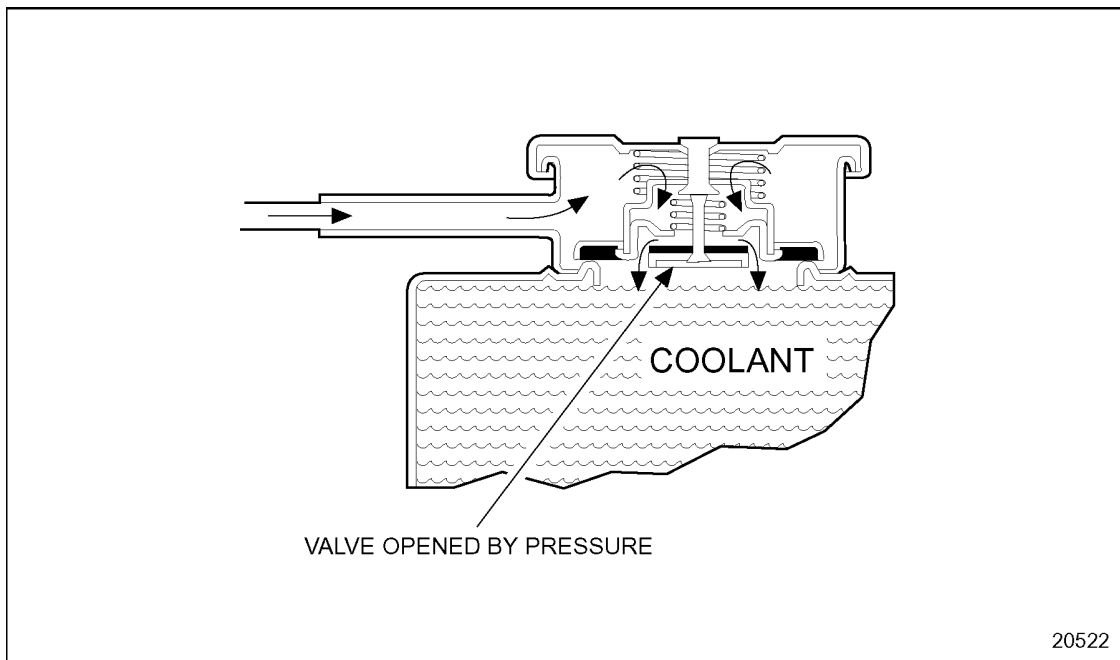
Pressure Control Cap (Vacuum Valve Open)
